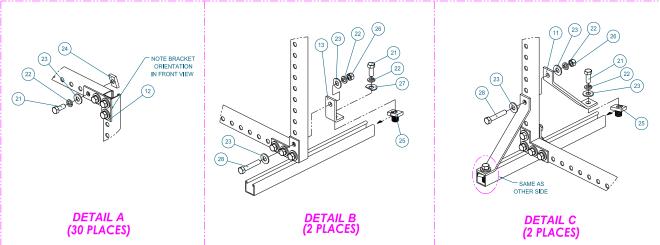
Uni-Strut Assembly, Hardware Placement
